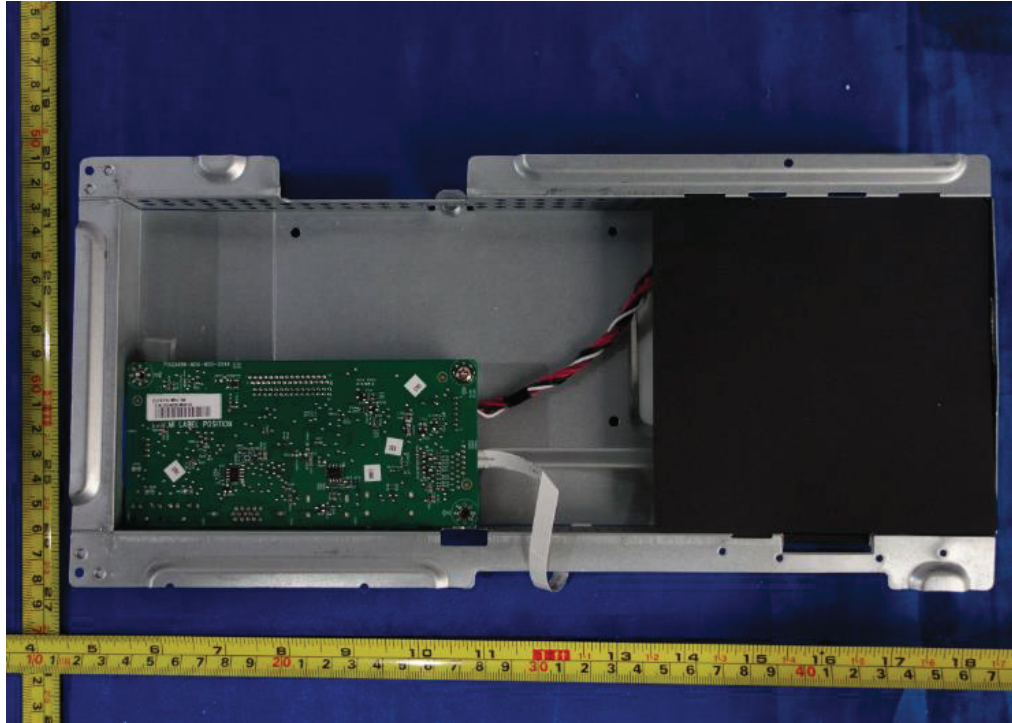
Metal enclosure type C with power board 715G7300 and main board 715G9496
